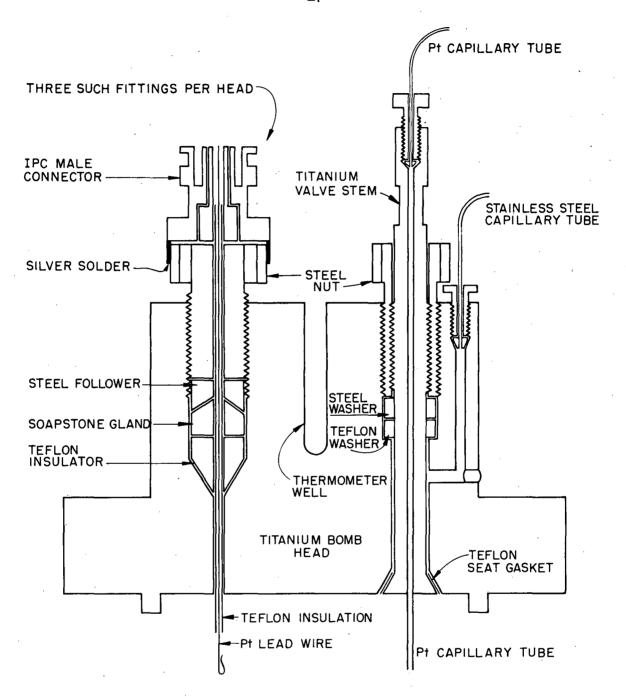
Titanium Bomb Head for Use with Autoclave Assembly Shown in Figure 2.
